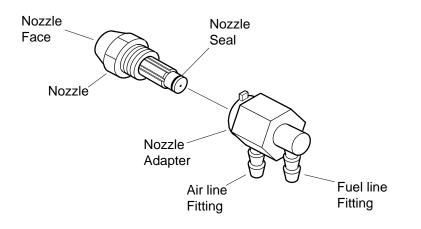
Nozzle and Nozzle Adapter, 8,8 kW (30,000 Btu/Hr) Model
